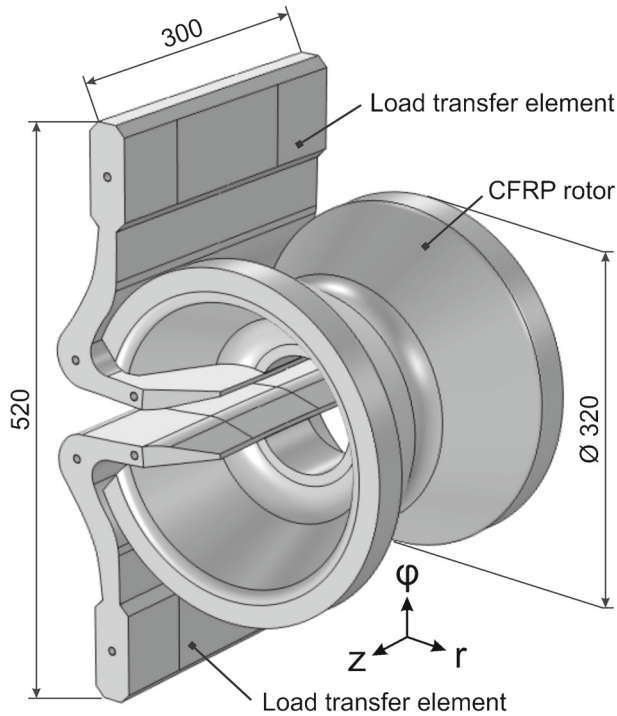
FSBT geometry consisting of the load transfer elements (steel) and the CFRP rotor; dimensions in mm
